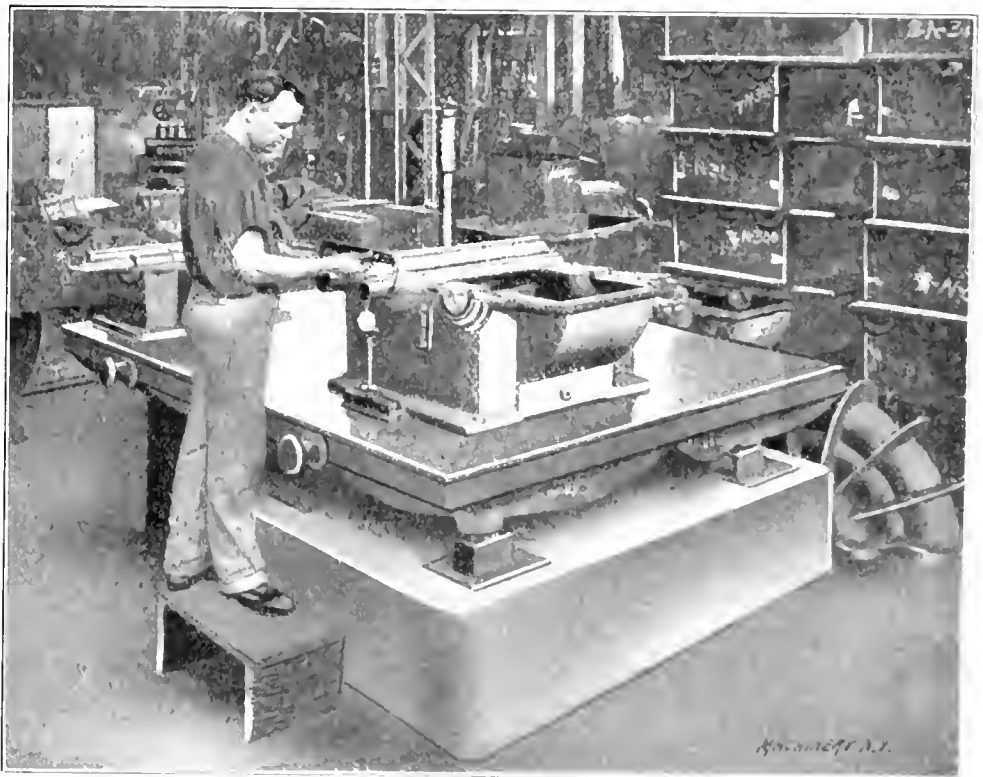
Testing Pockets for Bearings in Wheel Casing to insure that Gear Shafts will be Parallel and in the same Plane.
